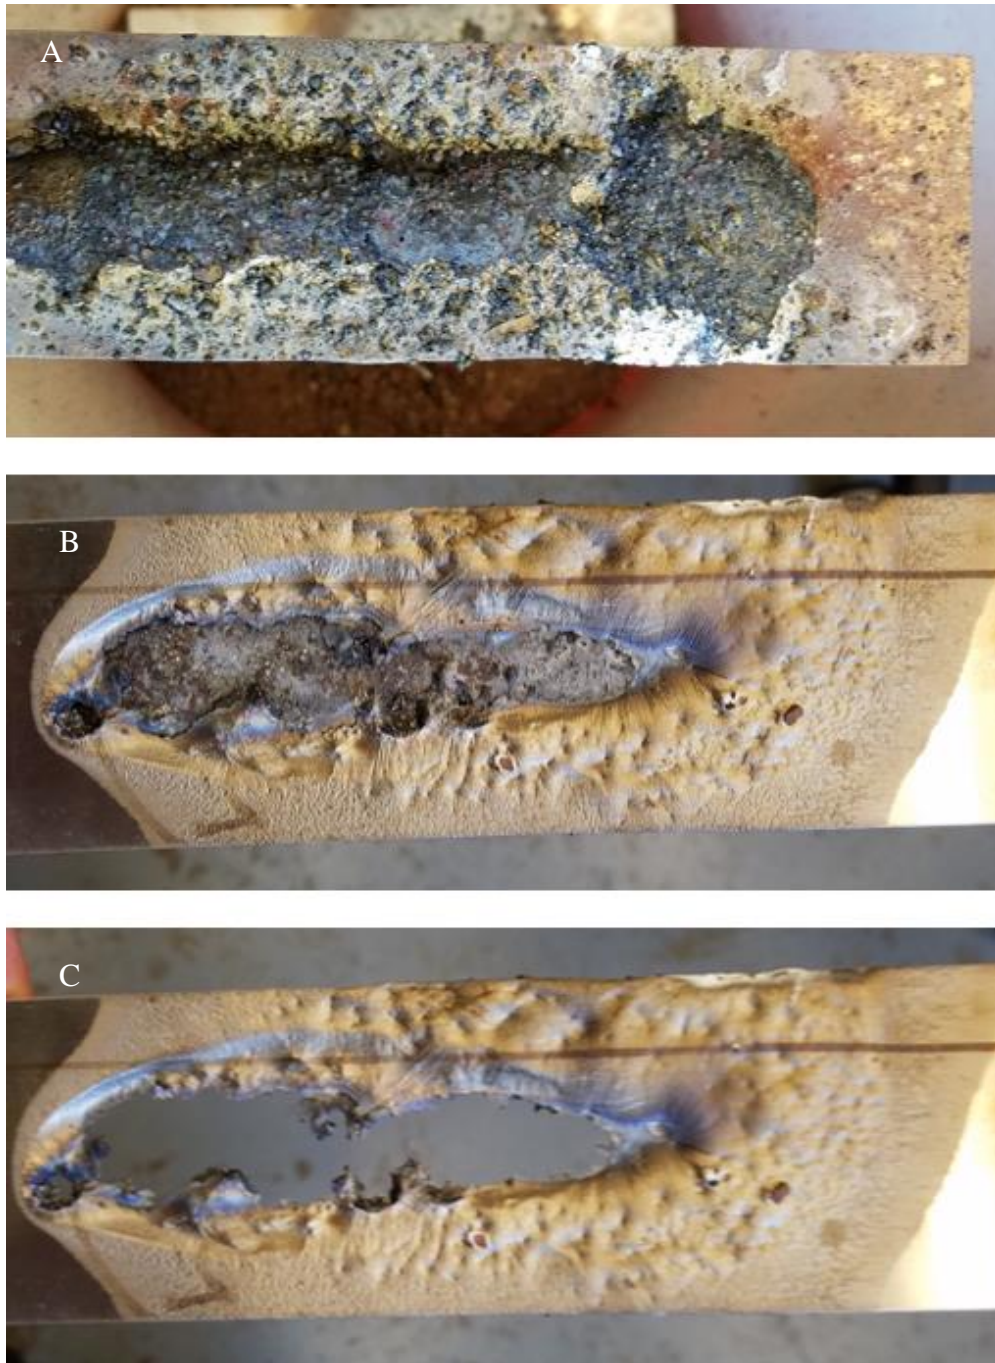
A) Top side of ignition 2, with slag. B) Bottom side of ignition 2, with slag. C) Slag removed, revealing hole
